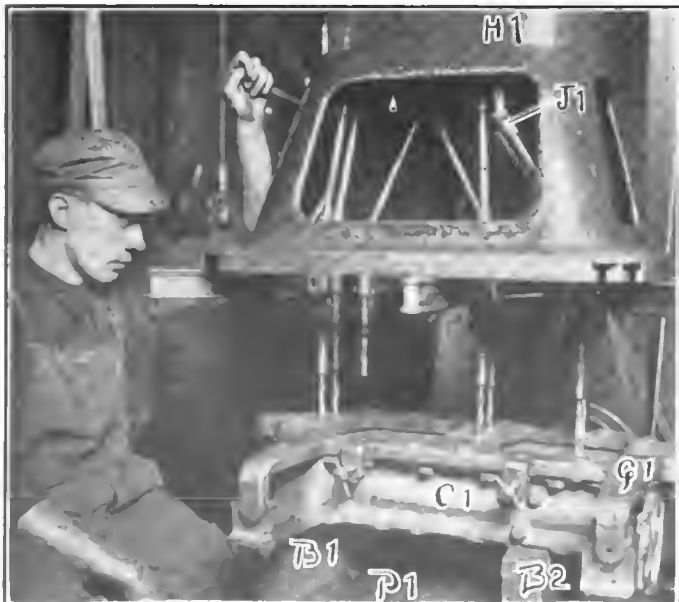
A multiple spindle drill having 16 spindles, some of which are engaged on a Regal crankcase, guided by a jig
